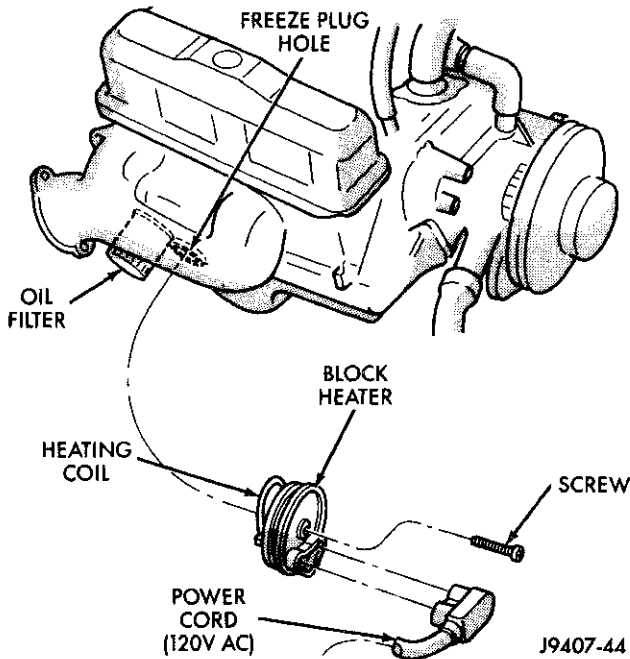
Block Heater—3.9L/5.2L/5.9L Gasoline Engine
